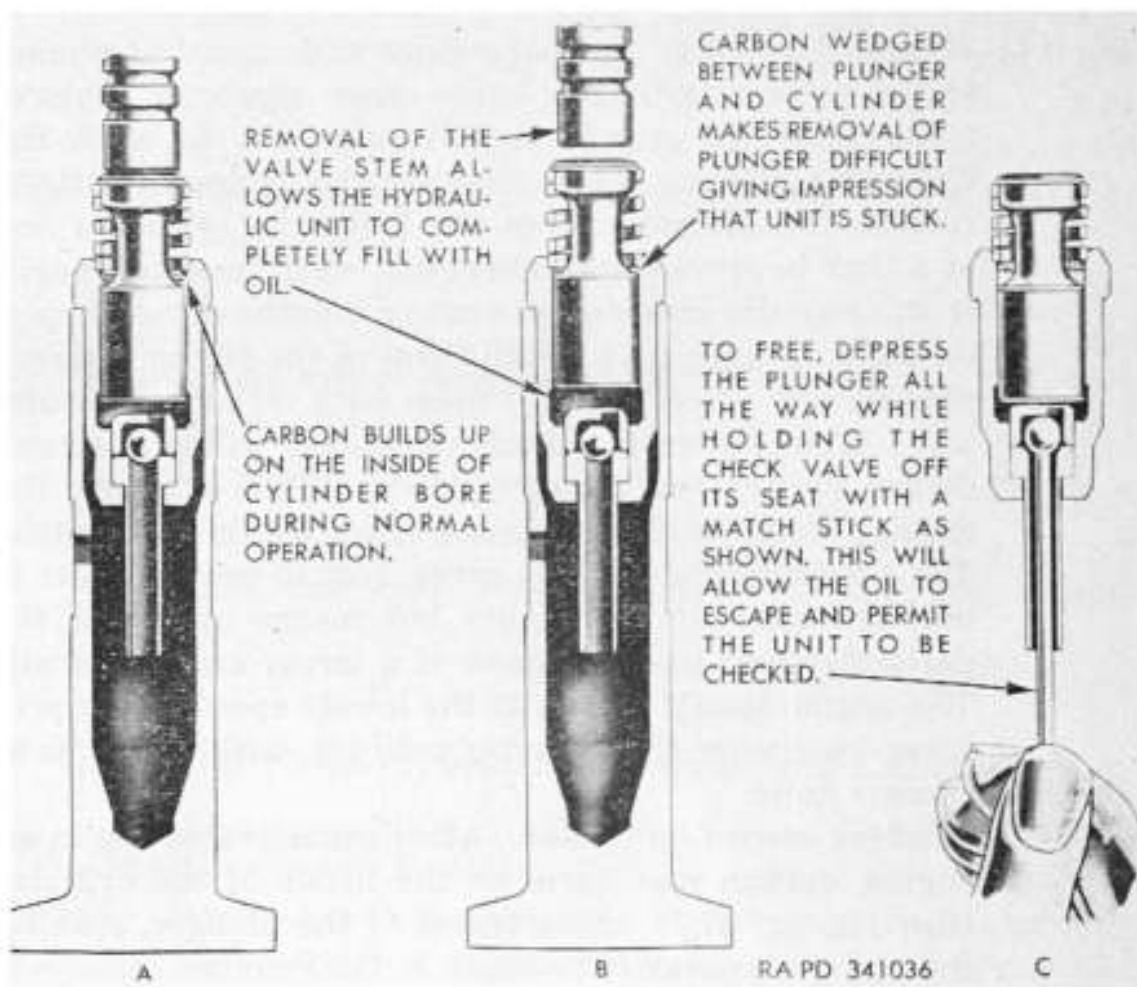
(Added) Cross-section views of hydraulic valve lifter.
